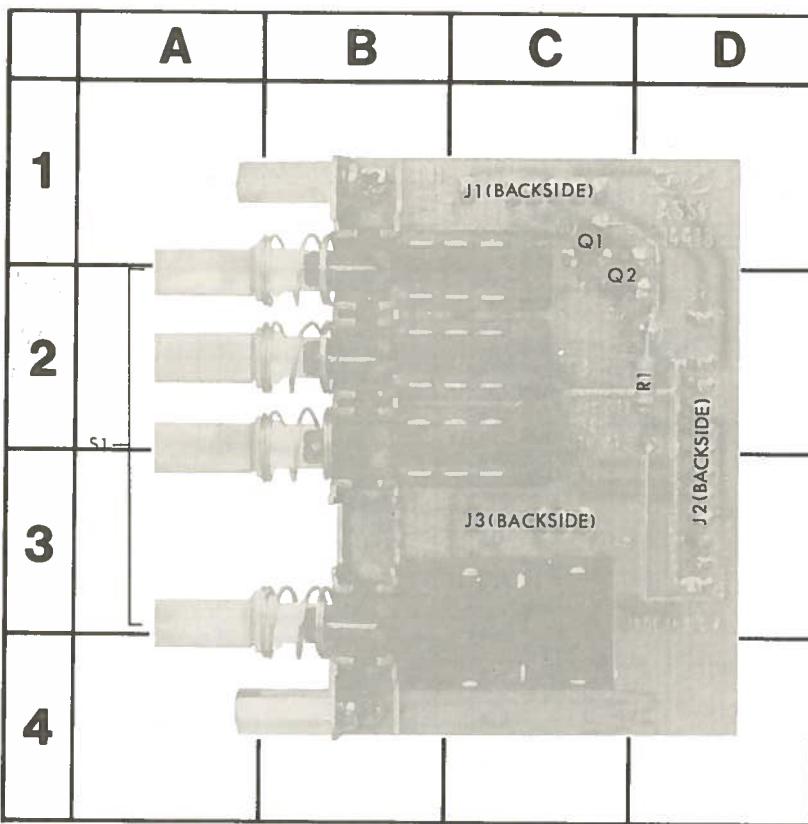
INTERCONNECT PCB ASSEMBLY
